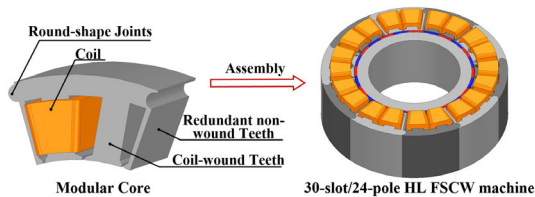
Three-dimensional (3-D) model of HL FSCW machine.
